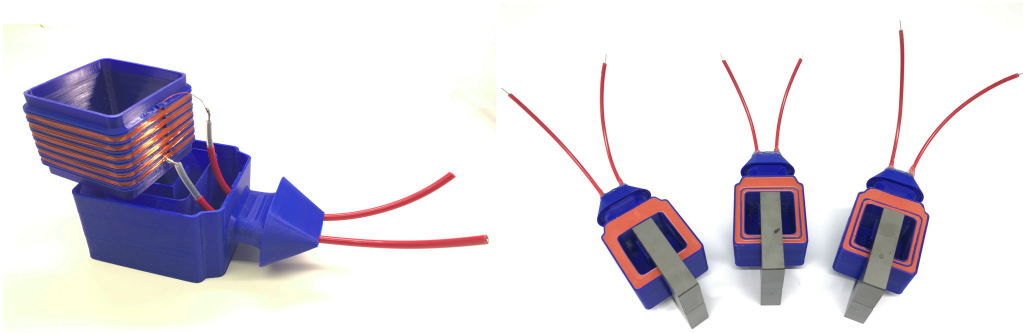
MFT secondary winding before silicon rubber casting (left) and after casting (right)
